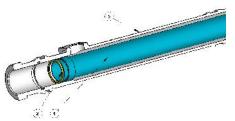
Schematic representation of the elastic safety lock mounting inside of end fitting
